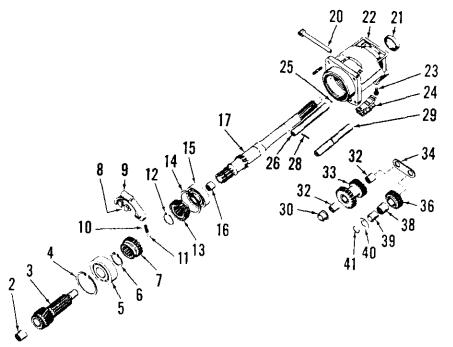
Exploded view of the forward and reverse transmission which is available for the Series 364, 384, 424, 444, 2424, 2444 and B-414 tractors.
